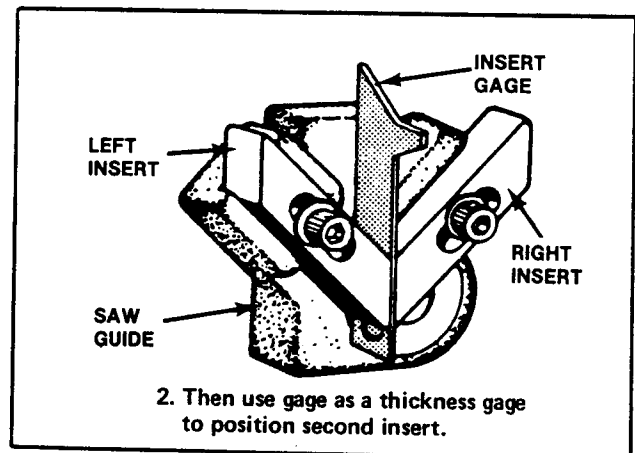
POSITIONING LEFT INSERT. UPPER GUIDE BLOCK SHOWN.
